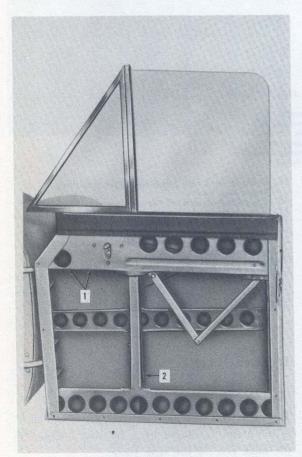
Door Side Shield Frame and Glass Assembly.
